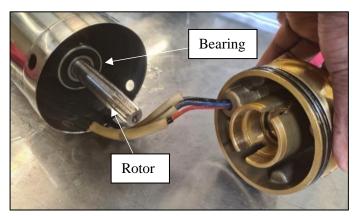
Pump with the end cap removed exposed the rotor and bearings.
